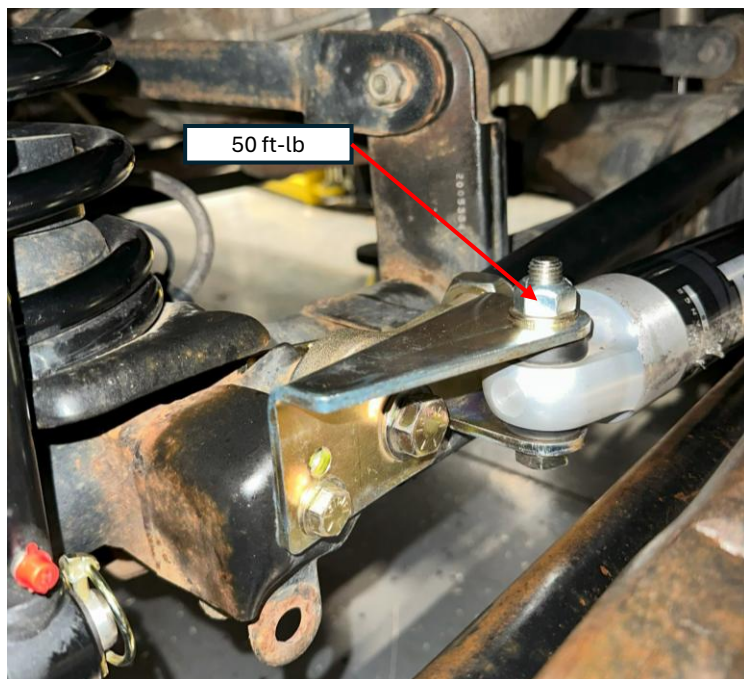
Stock steering stabilizer and Fox steering stabilizer installed with Steering Stabilizer Relocation Bracket COR-5209010
